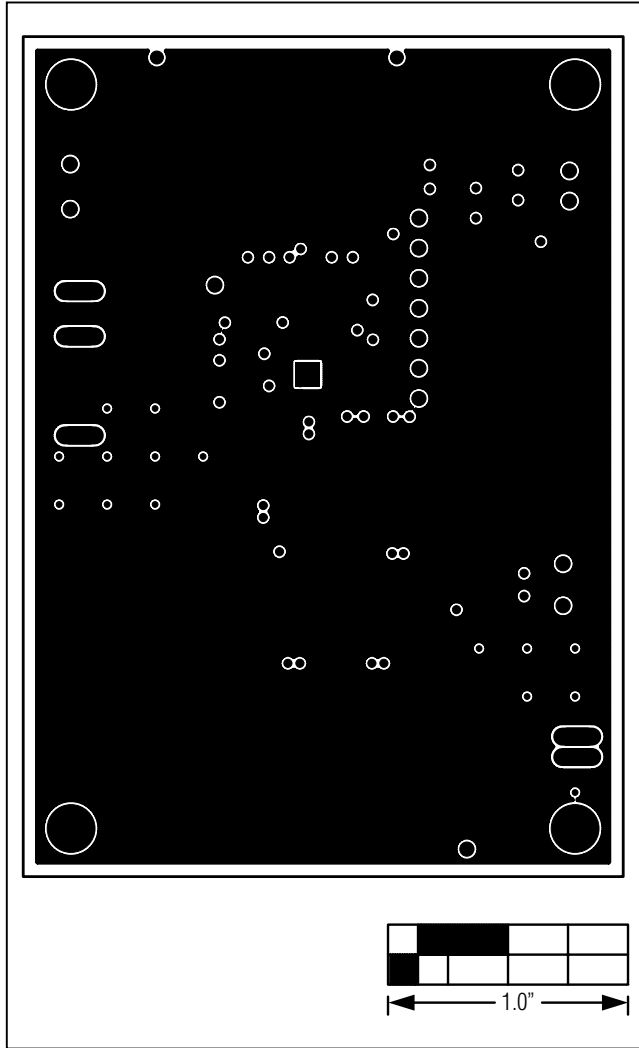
MAX17409 EV Kit PCB Layout—Internal Layer 2 (PGND Plane)
